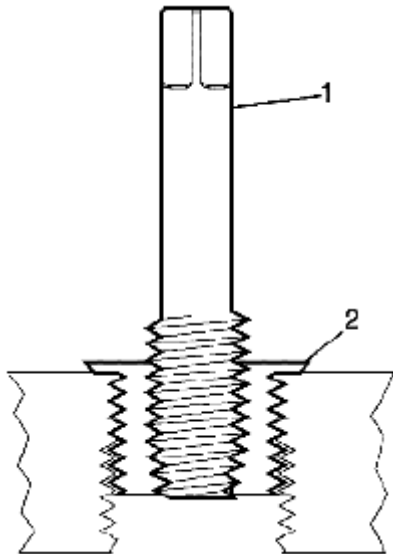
Identifying Flange Of Insert Contacts Surface Of Base Material
